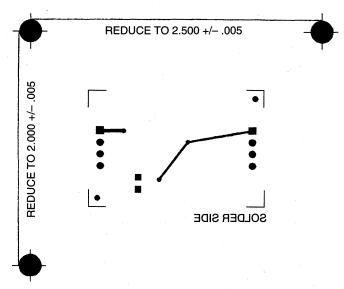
Printed Circuit, Wiring Side (Viewed from Component Side)
